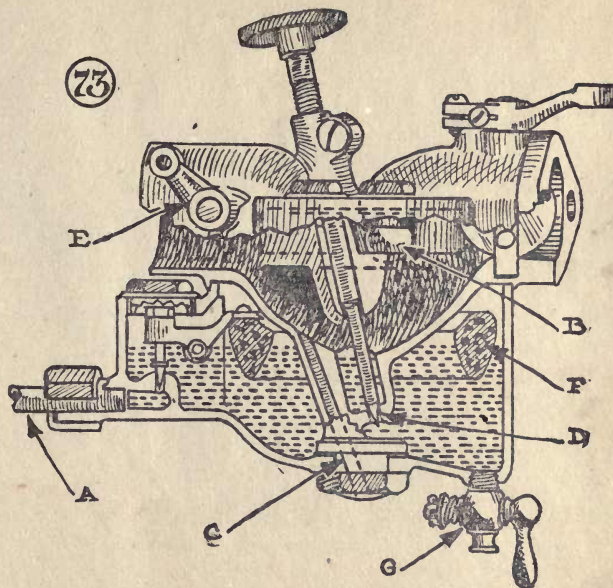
Section of Kingston Model L carbureter. A is the fuel intake, B the air valve, C the low-speed tube, D the fuel nozzle, E the choke throttle, F the float and G the drain cock
